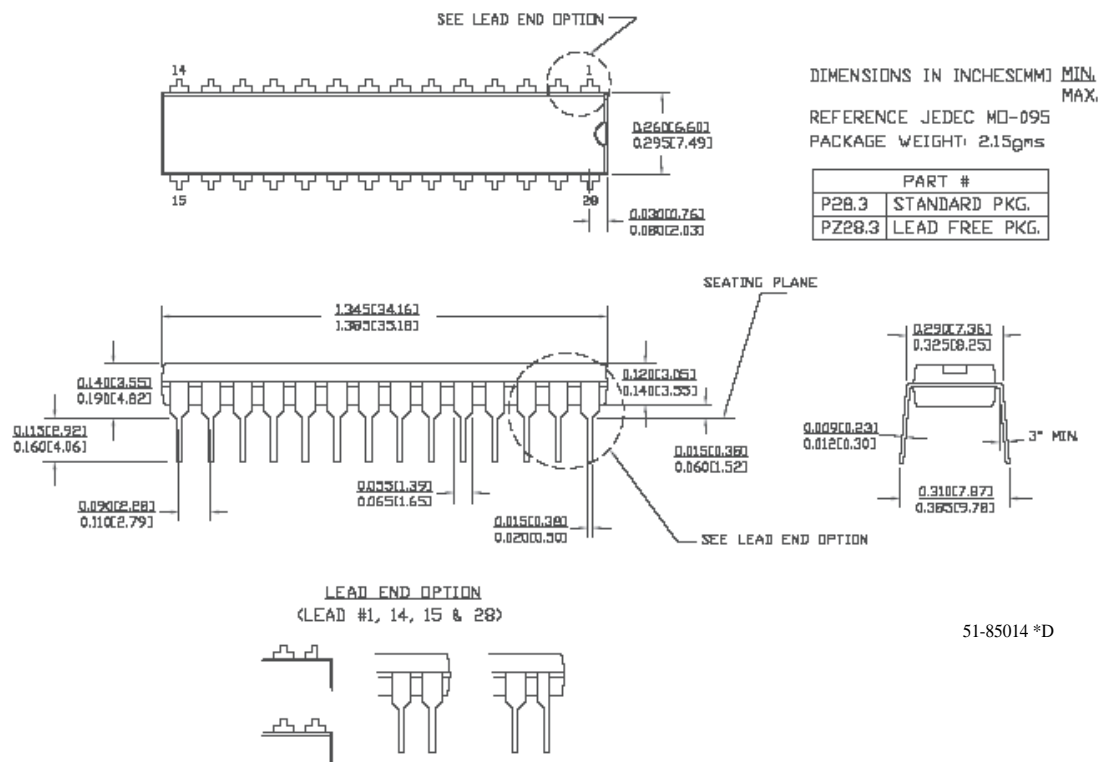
28-Lead (300-Mil) Molded DIP P21
